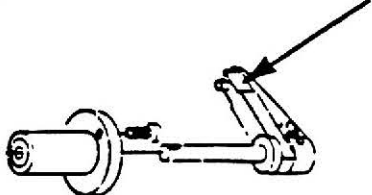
LUBRICATION-PRESSURE ROLL SPRING
